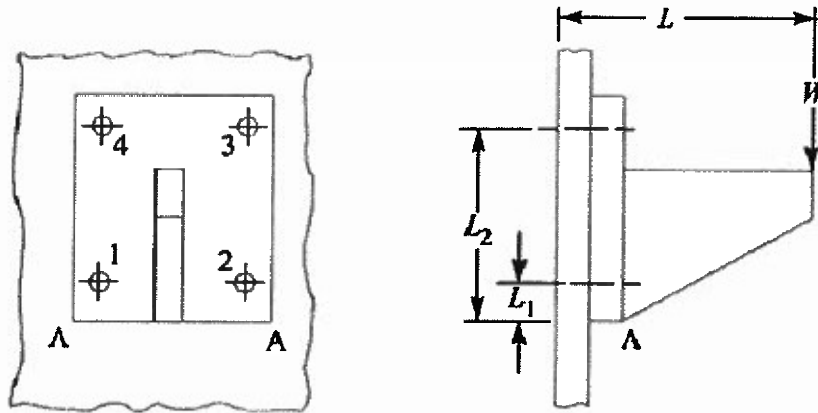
Eccentric load perpendicular to the axis of bolts.
